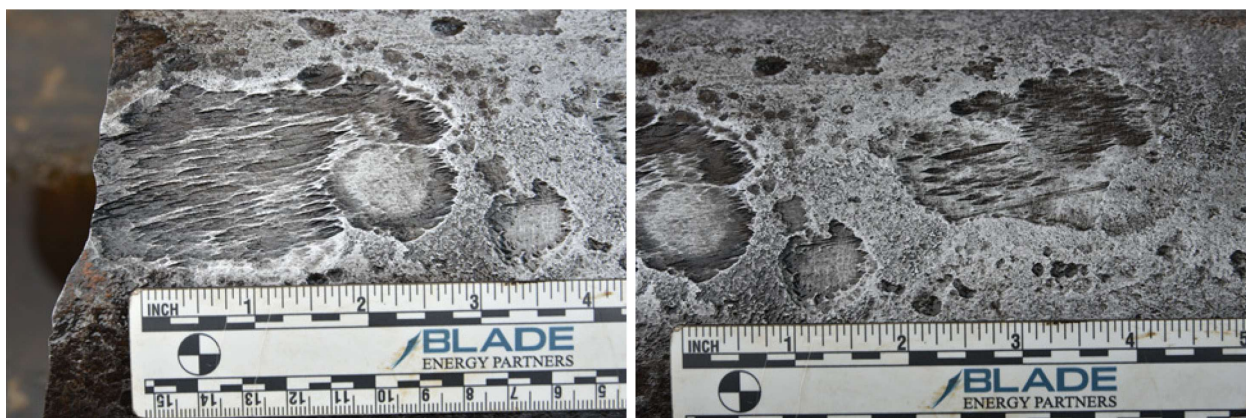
Corrosion with Striated Grooves Adjacent to Fracture Surface
